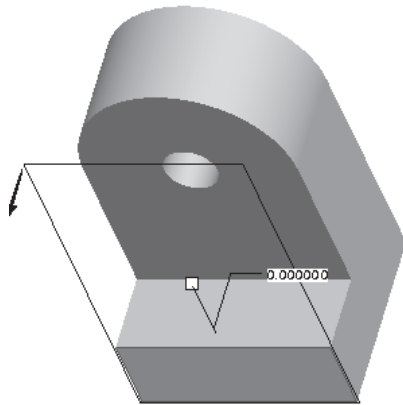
The selected face and the arrow showing the positive direction of datum plane
